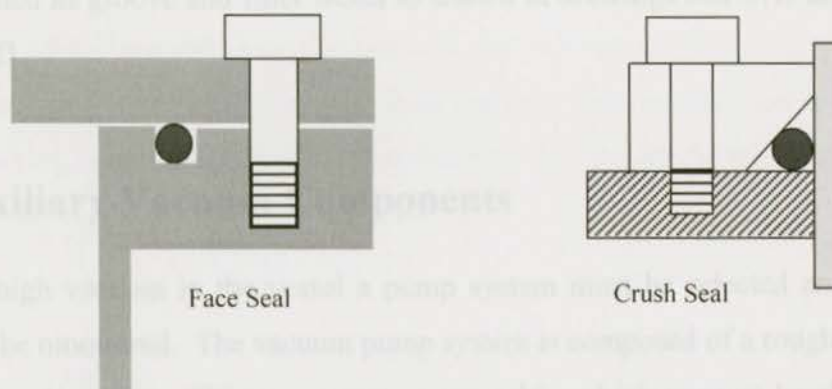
O-ring seals used in superconducting magnet outer shell design.
